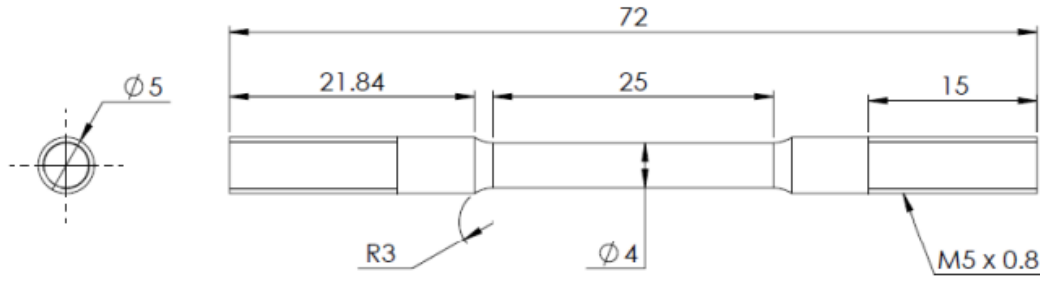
, Engineering tensile test specimen dimensioned drawing (Meade *et al.*, 2021)
